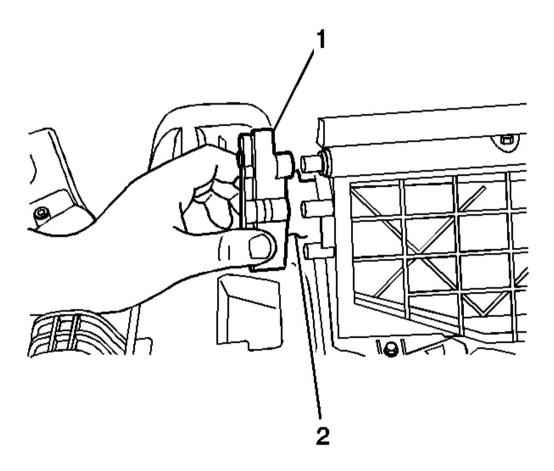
Recirculation Actuator & Recirculation Housing (Visteon) Courtesy of GENERAL MOTORS CORP.
